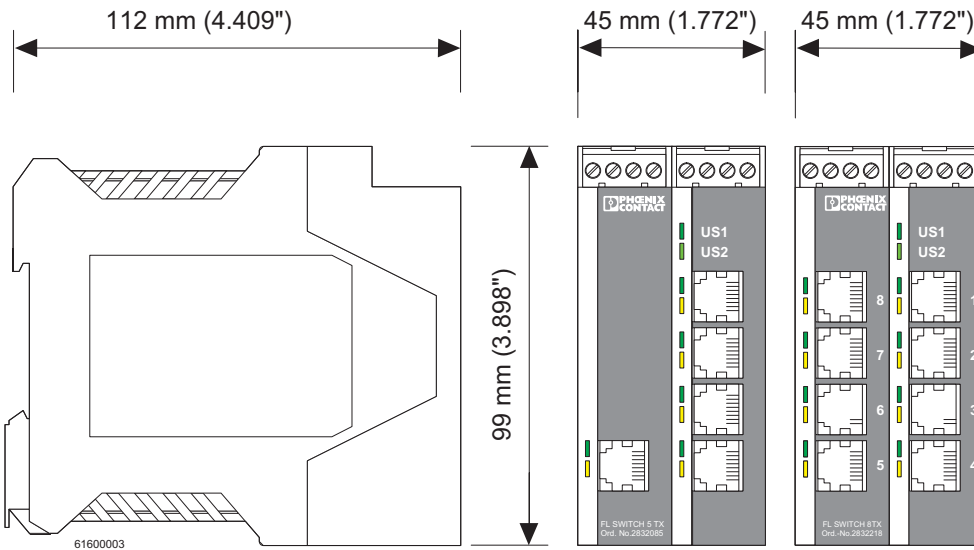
Housing dimensions for the FL SWITCH 5/8TX
